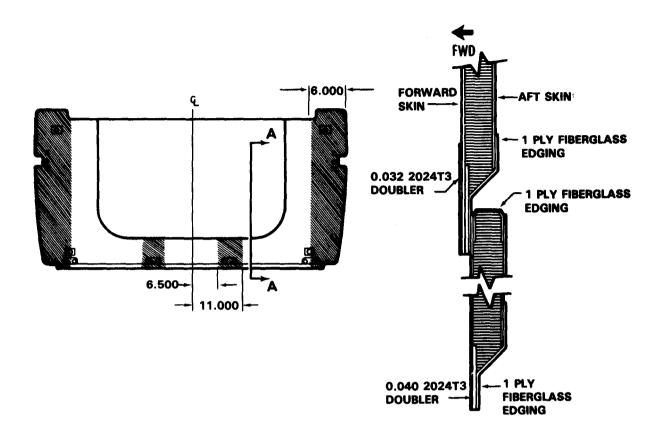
Honeycomb Panels - Passenger Seatback Bulkhead Repair (Sheet 1 of 2).
